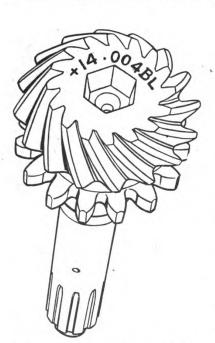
Spiral Bevel Gear and Clutch Shaft Showing Gauge and Back Lash Markings
